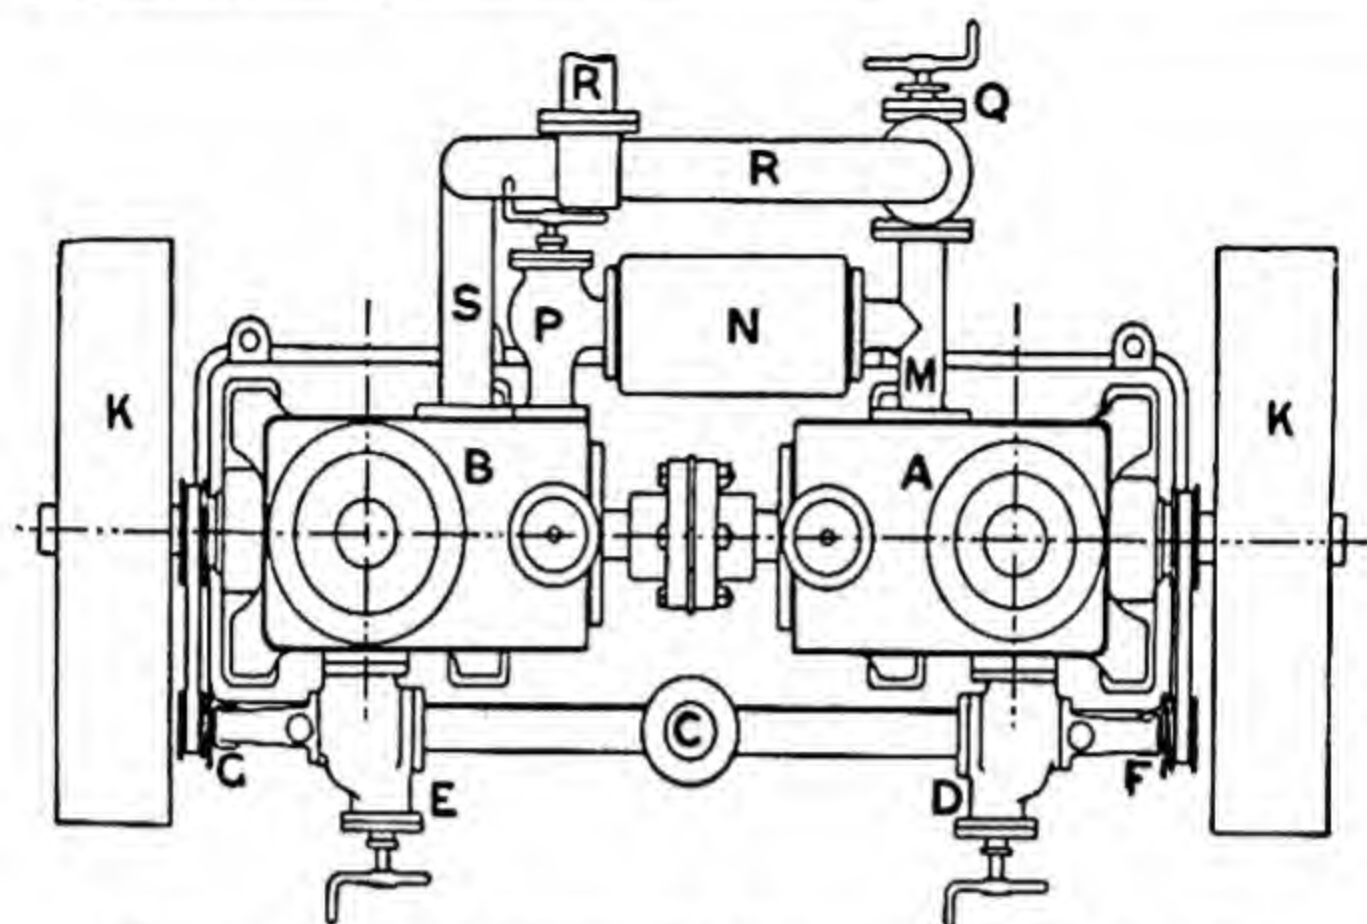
Plan of the experimental steam engines at the West Ham Technical Institute.
